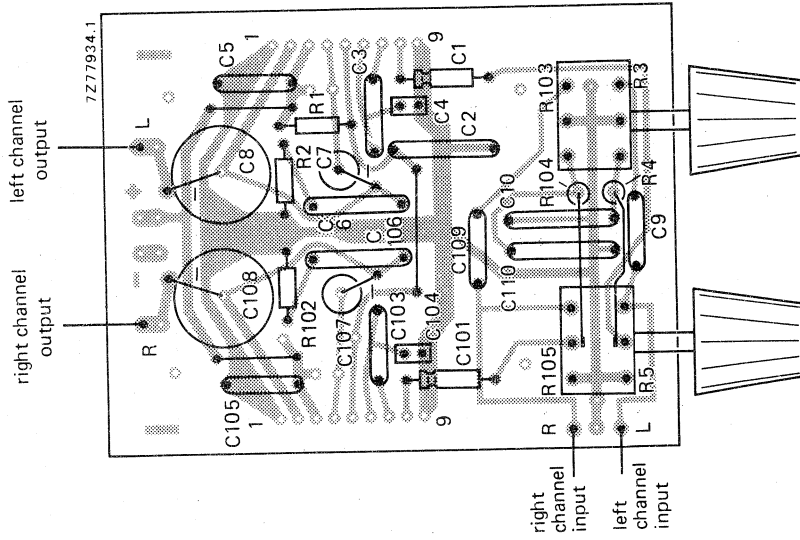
Component side of printed-circuit board showing component layout used for the circuit of Fig. 12. Balance control is not on the p.c. board.
